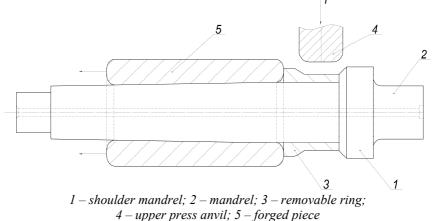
Removal scheme of forged pieces from the mandrel drawing
